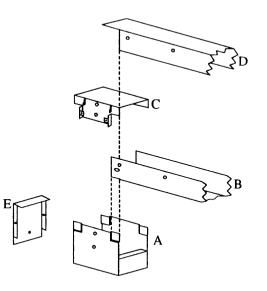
Assembly of Intercabinet Shielded Ducts
